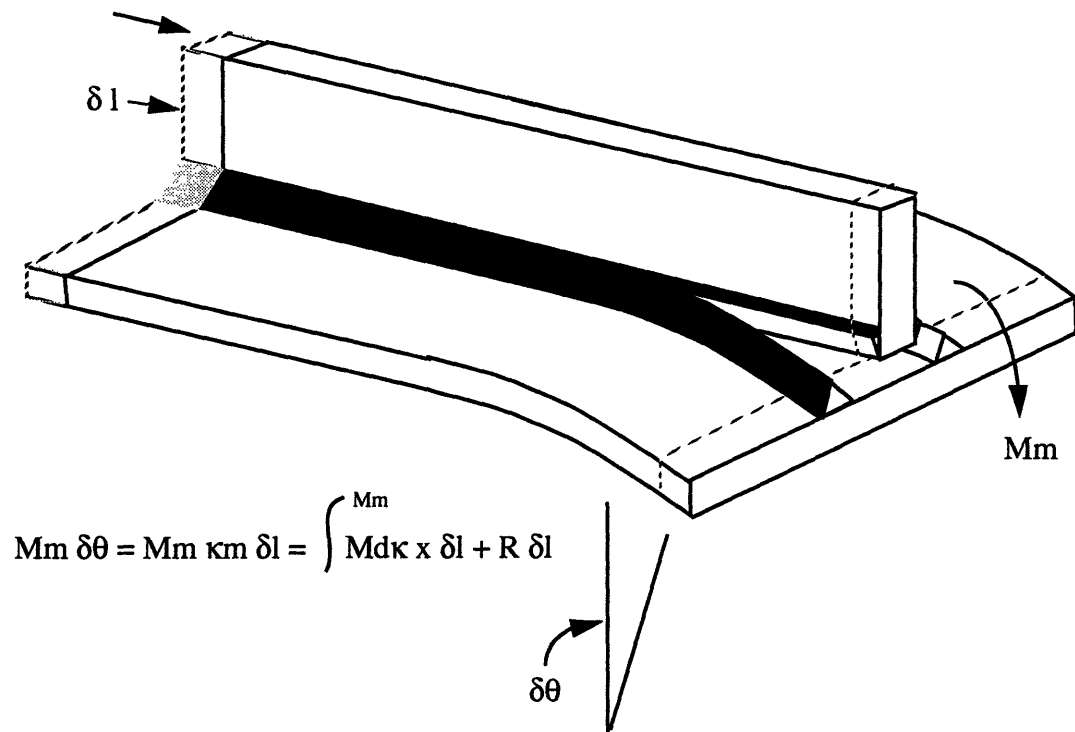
(a). Applied work for peeling fracture of a weld
